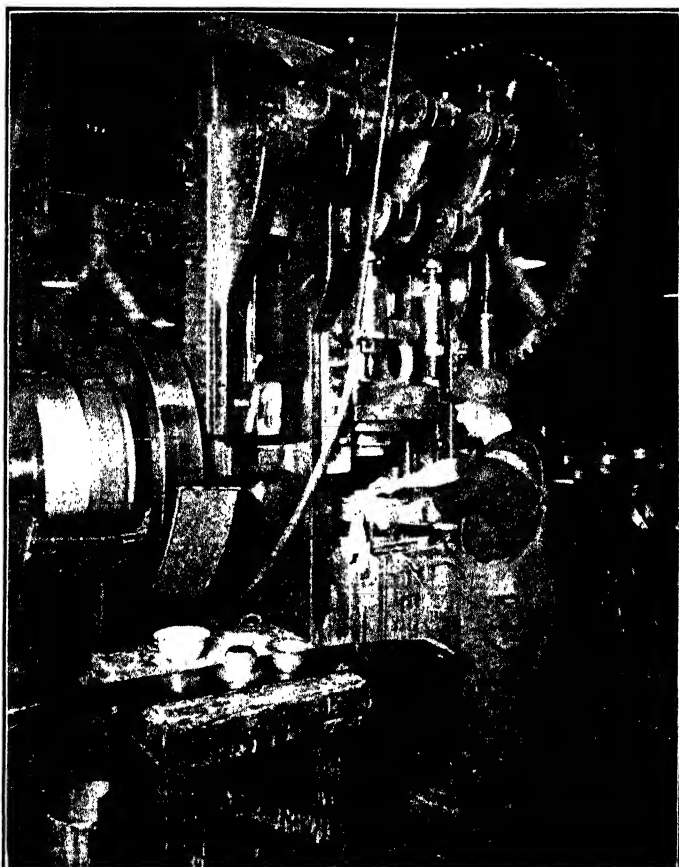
Drawing universal joint covers in a toggle drawing press with a soluble talc base lubricant.
